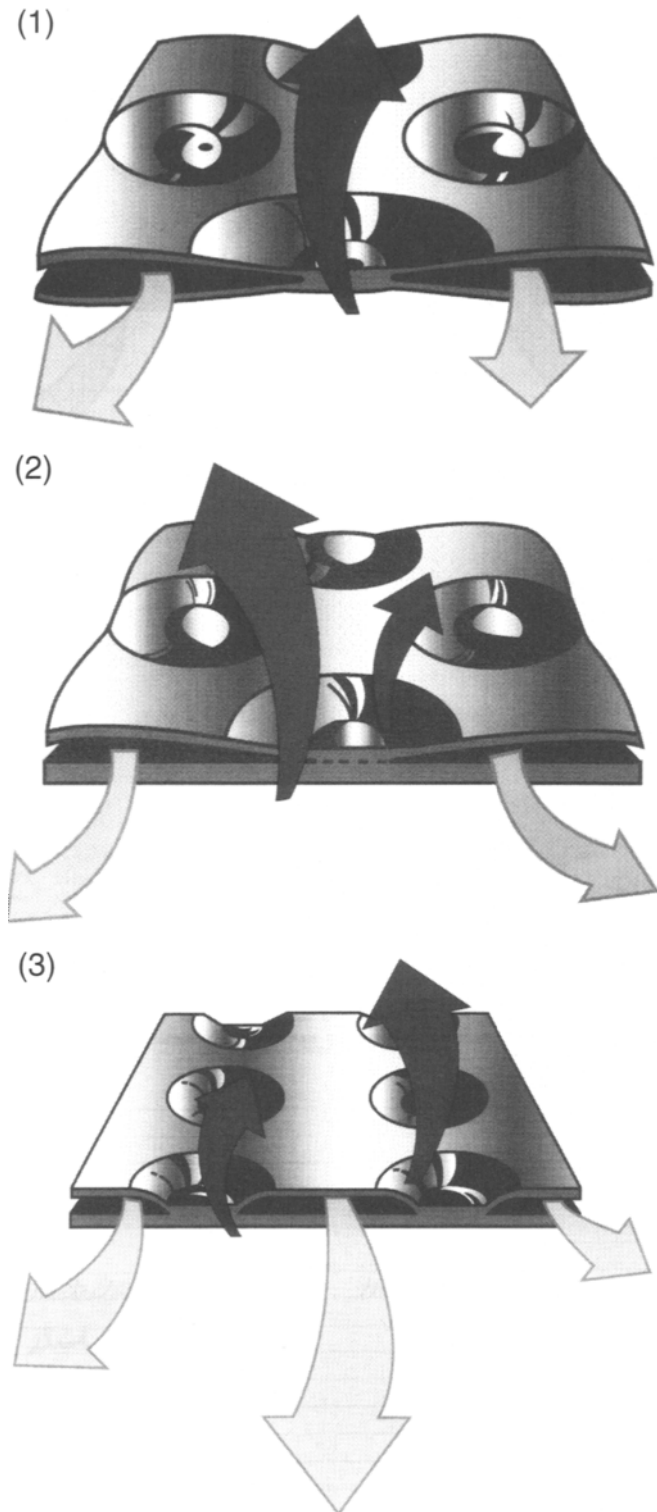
A. Styles of Mueller Temp-Plate® heat transfer plates. (1) Double-embossed surface, inflated both sides. Used in immersion applications, using both sides of the heat transfer plate. (2) Single-embossed surface, inflated one side, used for interior tank walls, conveyor beds. (3) Dimpled surface (one side), available MIG plugwelded or resistance spot welded. Used for interior tank walls, conveyor belts. (Used by permission: Bul. TP-108-9, ©1994. Paul Mueller® Company.)
